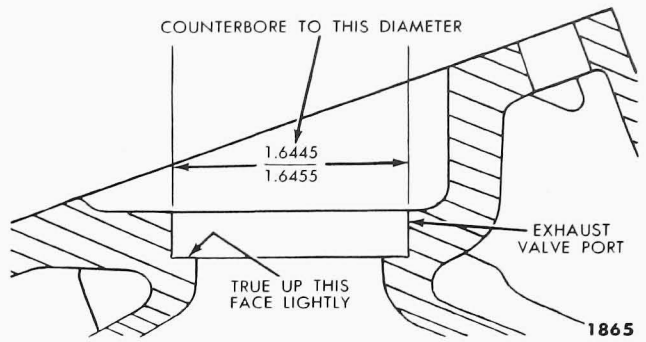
Counterbore for Oversize Insert (279 or 317 Cu. In. Engine)
